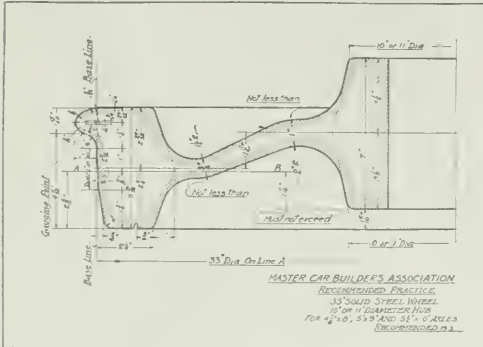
Recommended Practice for 33 in. Solid Steel Wheels for 5 1-2 in. x 10 in. Axles and Under.
